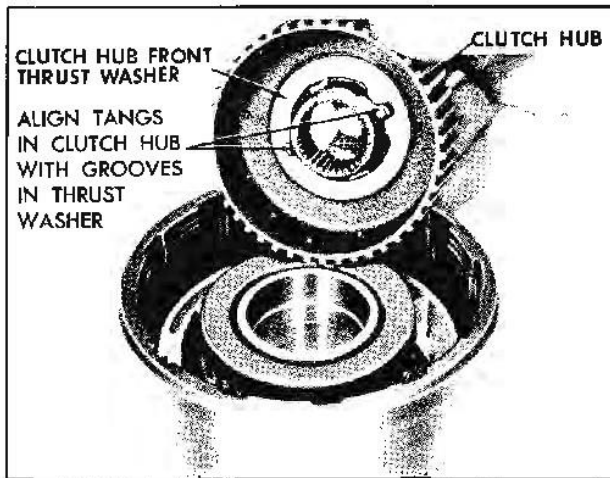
B-82 Installing Clutch Hub Front Thrust Washer
